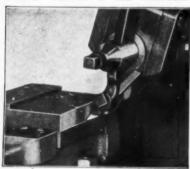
Small fixture base held in vise; clapper head tilted for back stroke clearance in connection with tool post slide feed.
